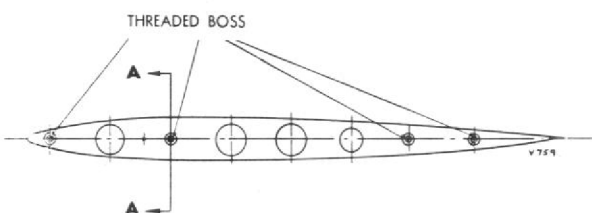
Threaded bosses in exhaust cone fairing. For section A-A see Fig. 10 and 11.
